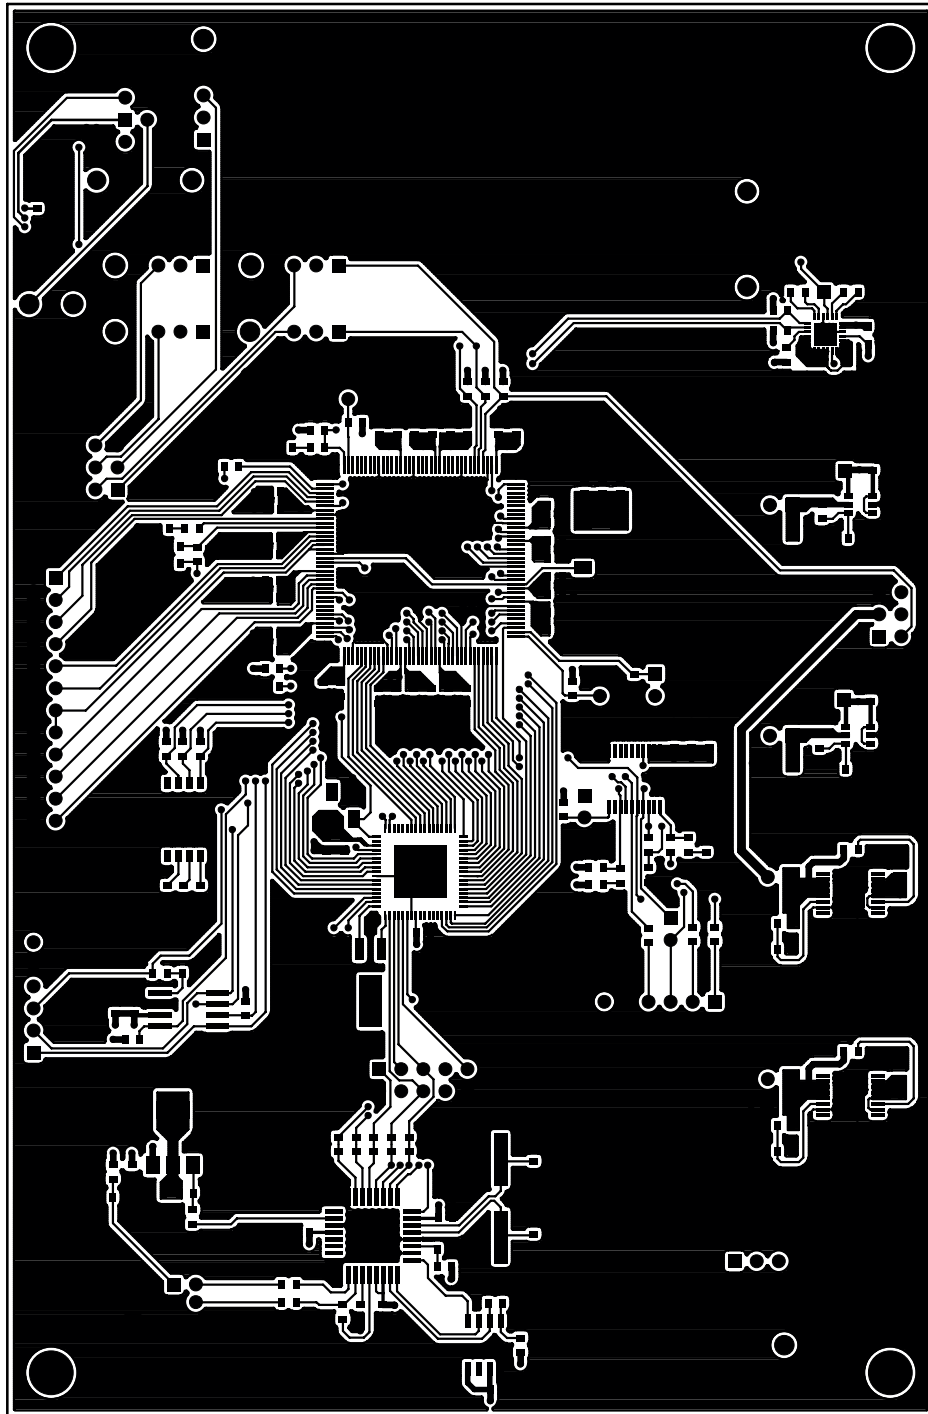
MAX44000 EV Kit PCB Layout—Bottom Side
